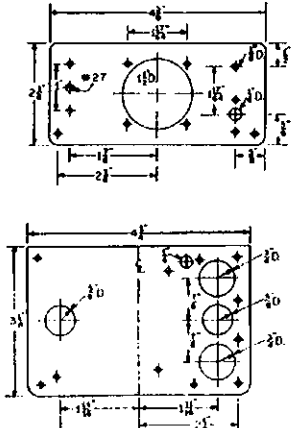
Dimensions of the front and back plates for the ARC-Port.
